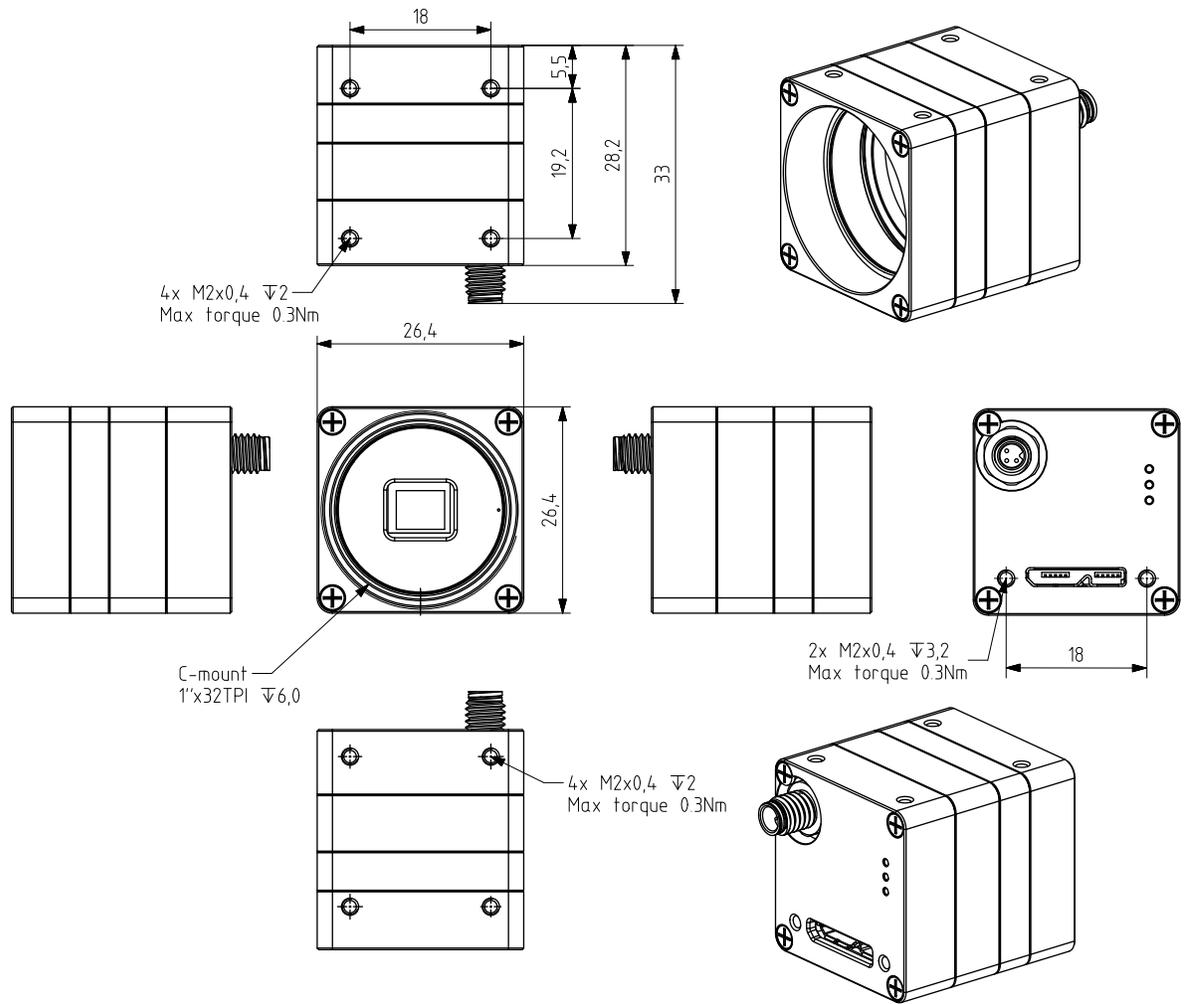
Dimensional drawing of MQ013xG-ON-S7
